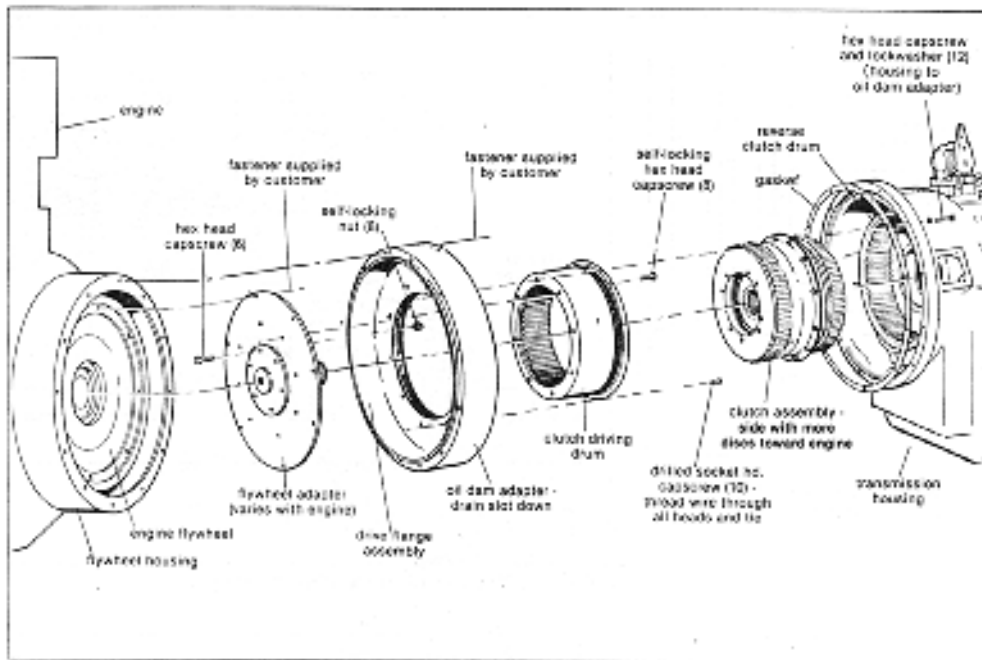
Sequence of Assembly: Adapter Parts, Clutch and Housing
